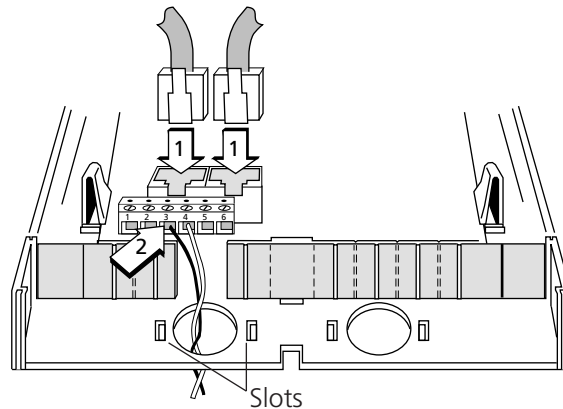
Wiring of modular or twisted pair cabling, 1 and 2.
